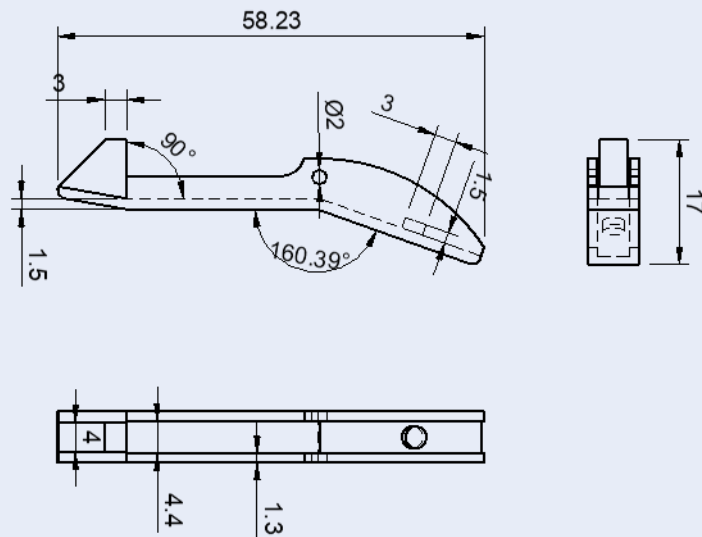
Front, Top, and Side views 2D design with detailed dimensions of the trigger. Overall dimensions are roughly 58 mm x 4 mm x 17 mm, bending angle is about 160 degrees.
